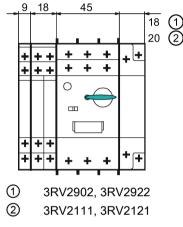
Motor starter protectors with screw-type and spring-loaded connection, S00/S0
